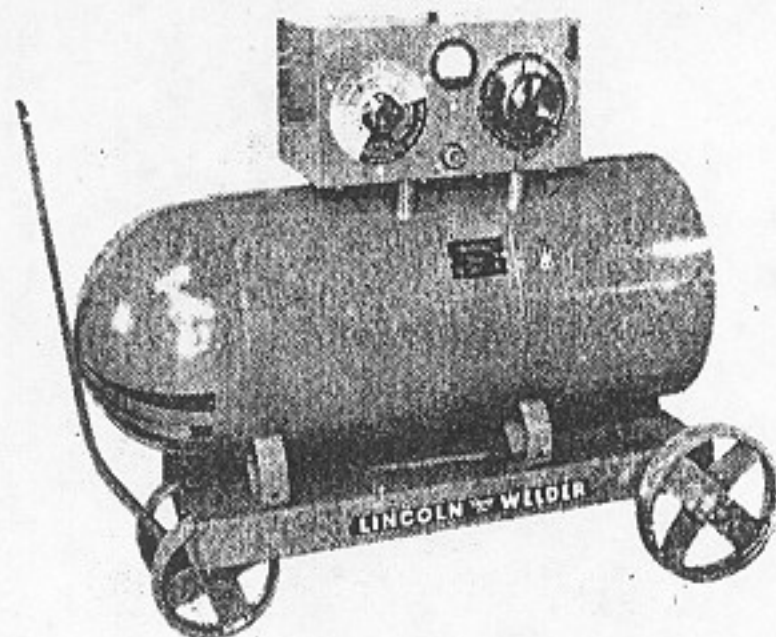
Arc welder with self-indicating dual continuous control.
